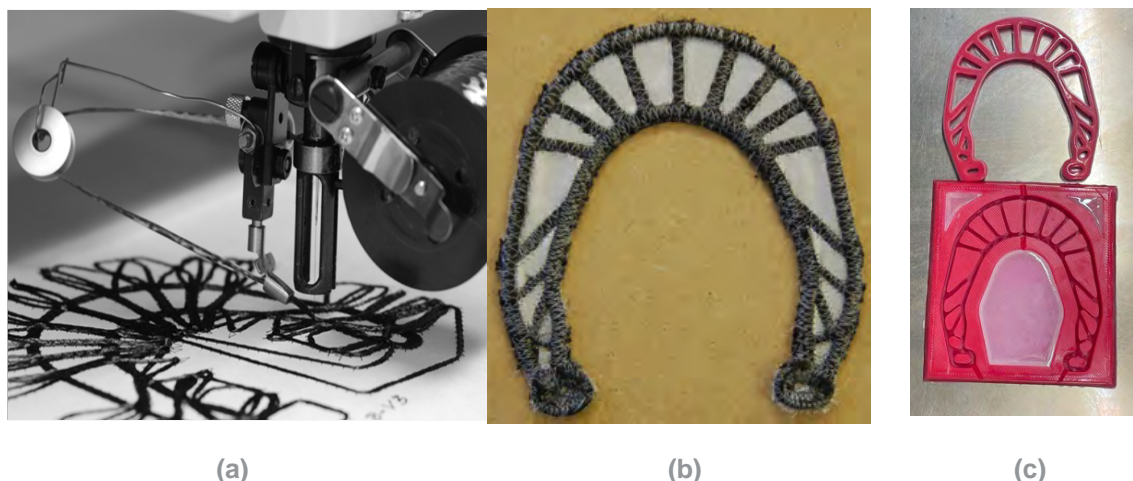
(a) Manufacturing of the brake booster preform by TFP (carbon roving), (b) the partially pre-cut preform, and (c) top and bottom of the silicone mold made by casting of 3D-printed models .
